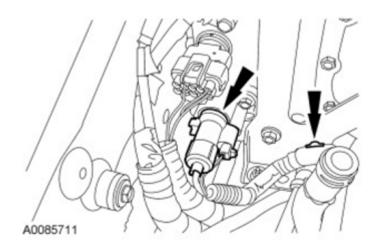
Locating Coolant Vent Hose Courtesy of FORD MOTOR CO.
